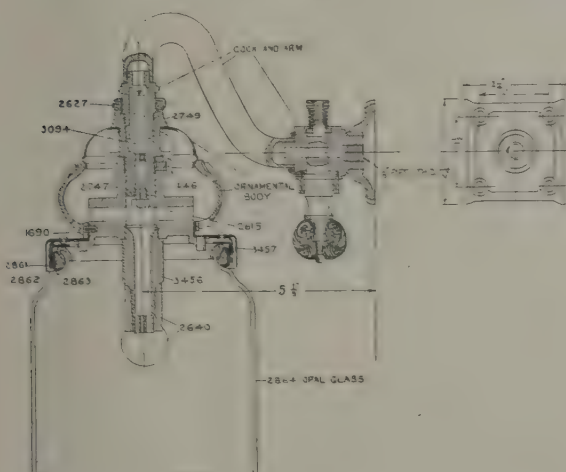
Section Through Bracket Mantle Lamp No. 2506.
